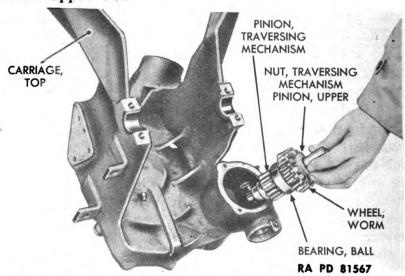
Removing the Traversing Mechanism Pinion and Allied Parts
